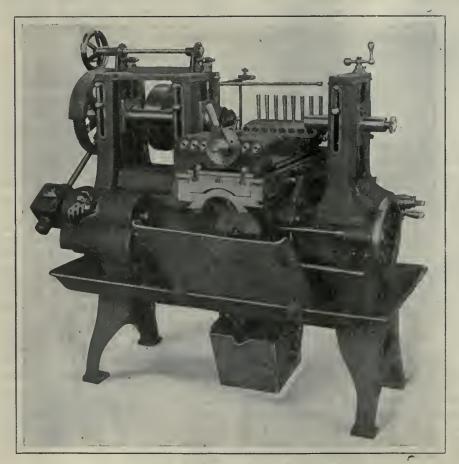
MOTOR-DRIVEN ENGINE LATHE.
